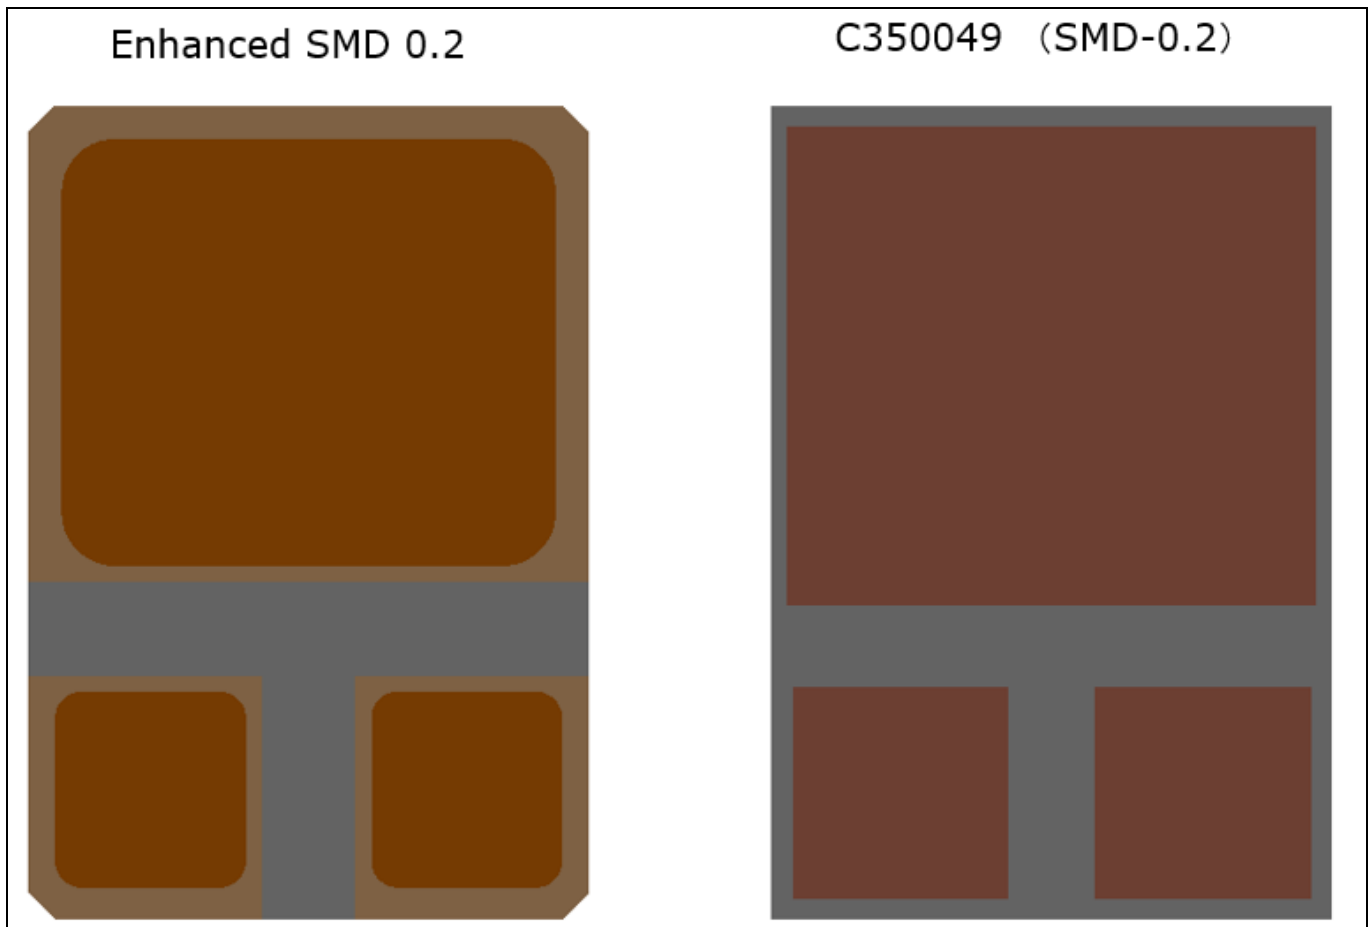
(Bottom view) SMD-0.2e (left) has smaller soldering areas for all three pads but will effectively mate with SMD-0.2 (right) PCB footprints
